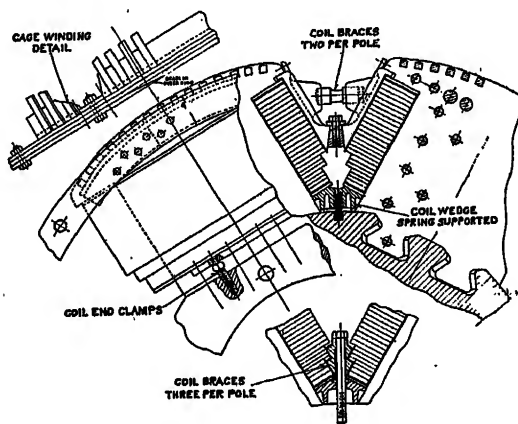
SOME DETAILS OF ROTOR DESIGN
